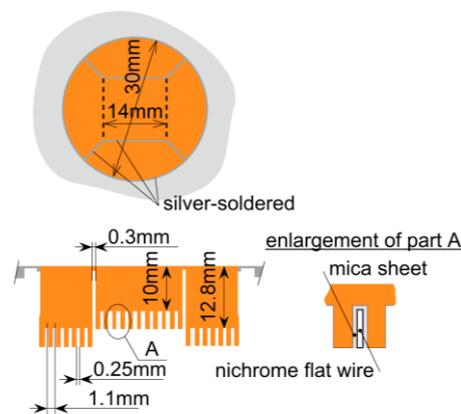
Heat transfer surface consisting five parts to keep temperature uniformity
